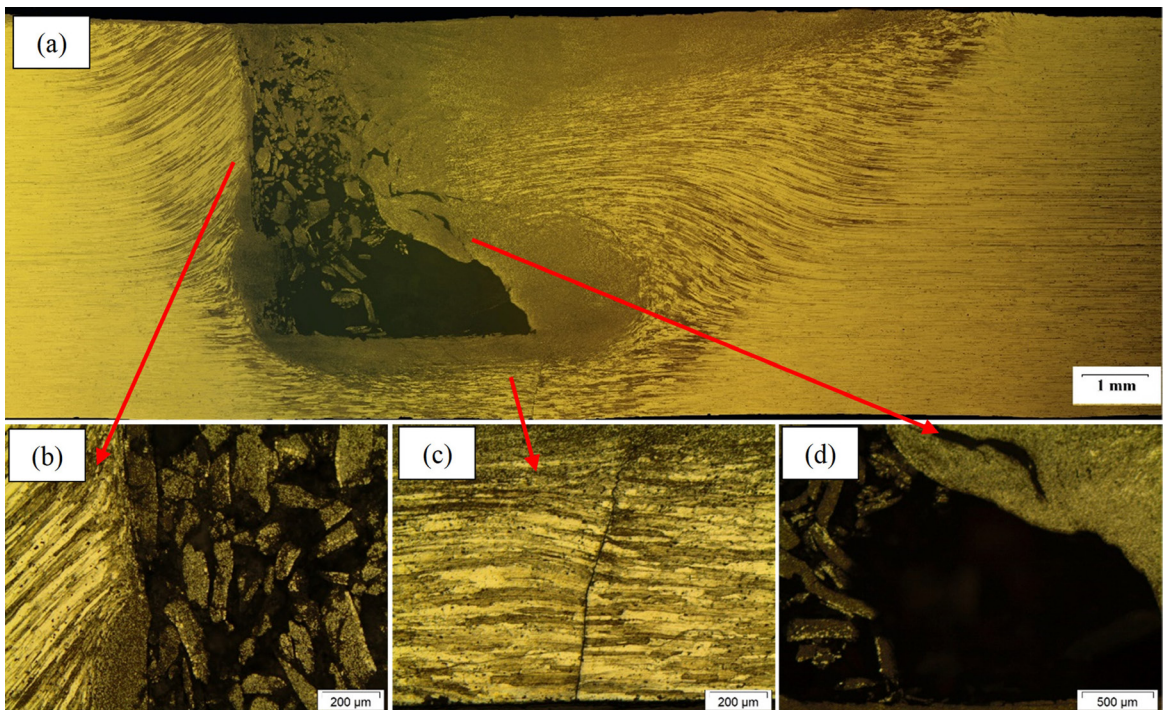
Macro and microstructure of the welded joint 4: (a) Macrograph of the cross section, (b) Micrograph of the region between TMAZ and SZ on the retreating side observing lack of mixture, (d) welding defect due to lack of union, and (c) welding defect in the SZ on the retreating side due to lack of mixture.
